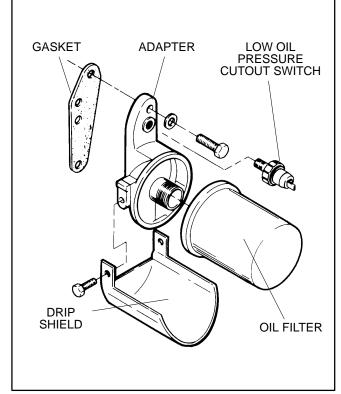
OIL FILTER AND PRESSURE SWITCH
